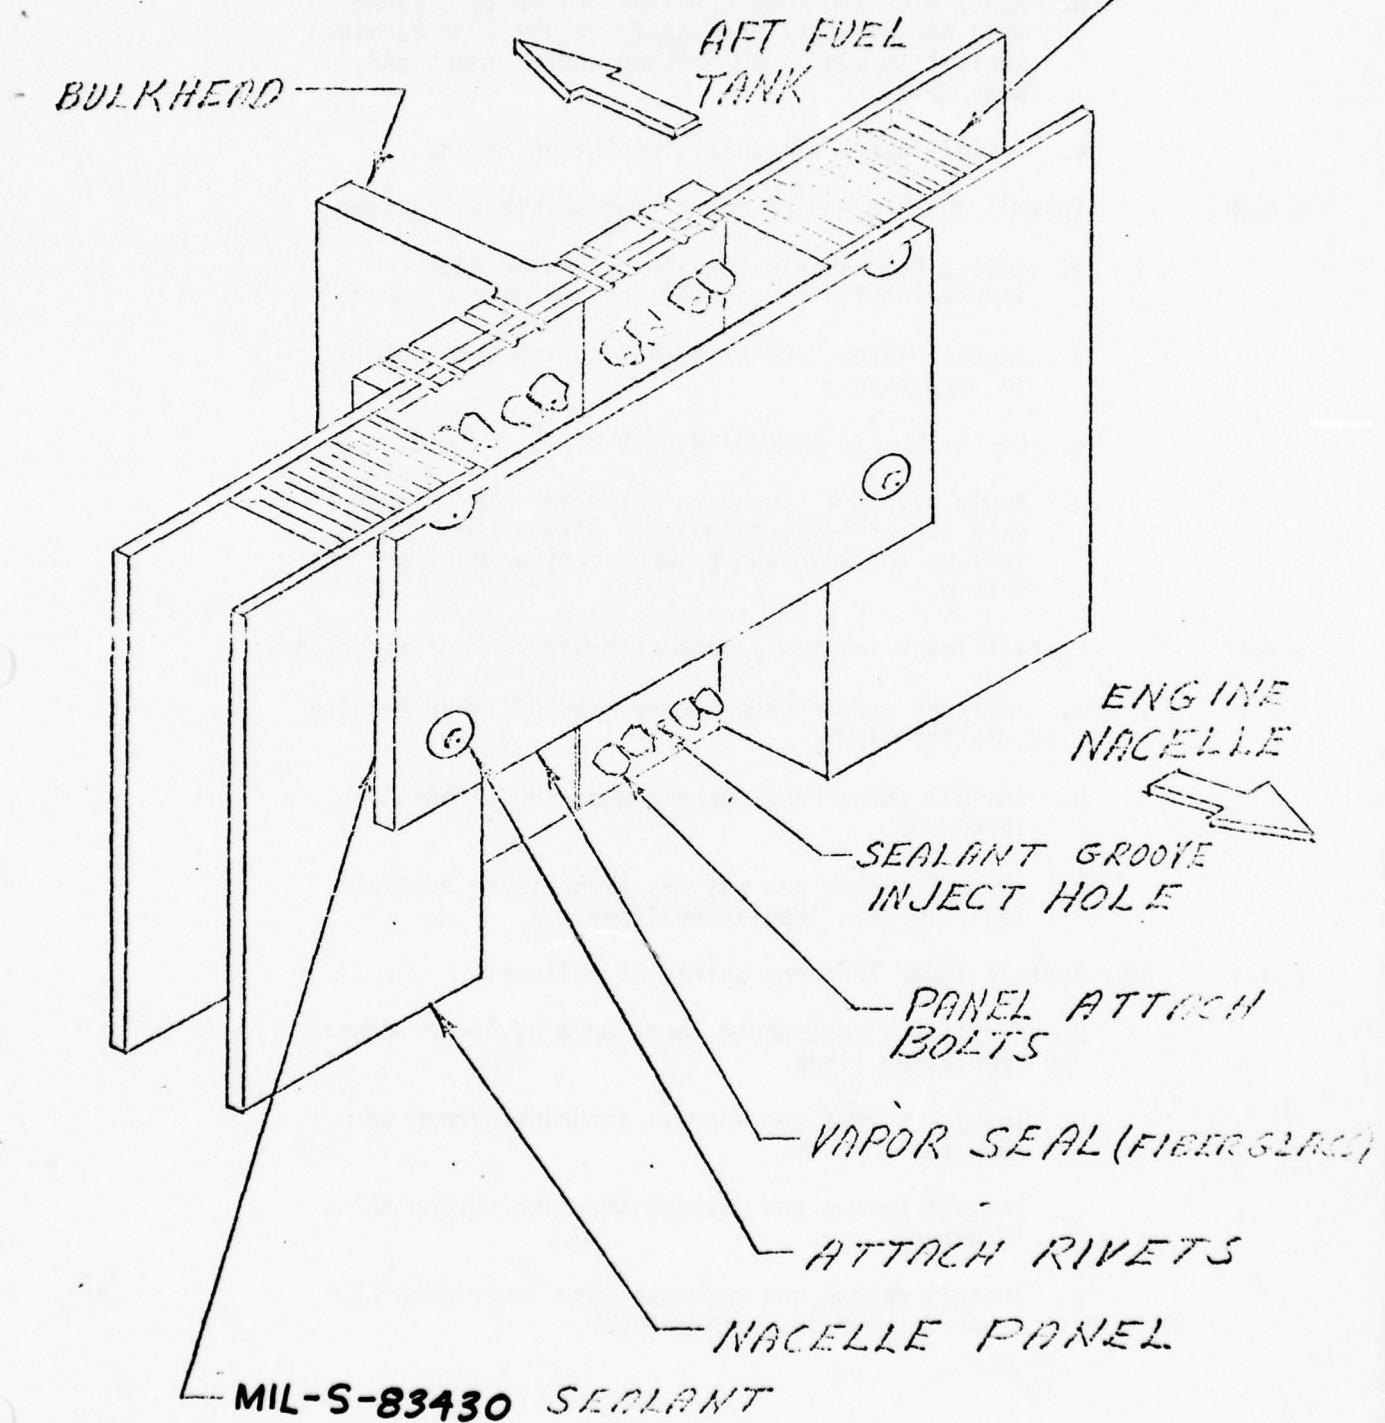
Vapor Barrier Seals (Sheet 2)
